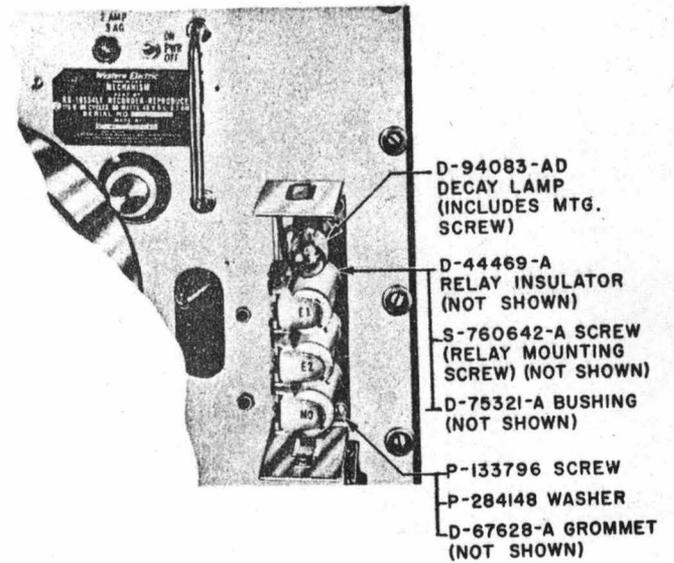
Decay Lamp and Relays Mounted on Recorder-Reproducer Mechanism (Cover Removed)
